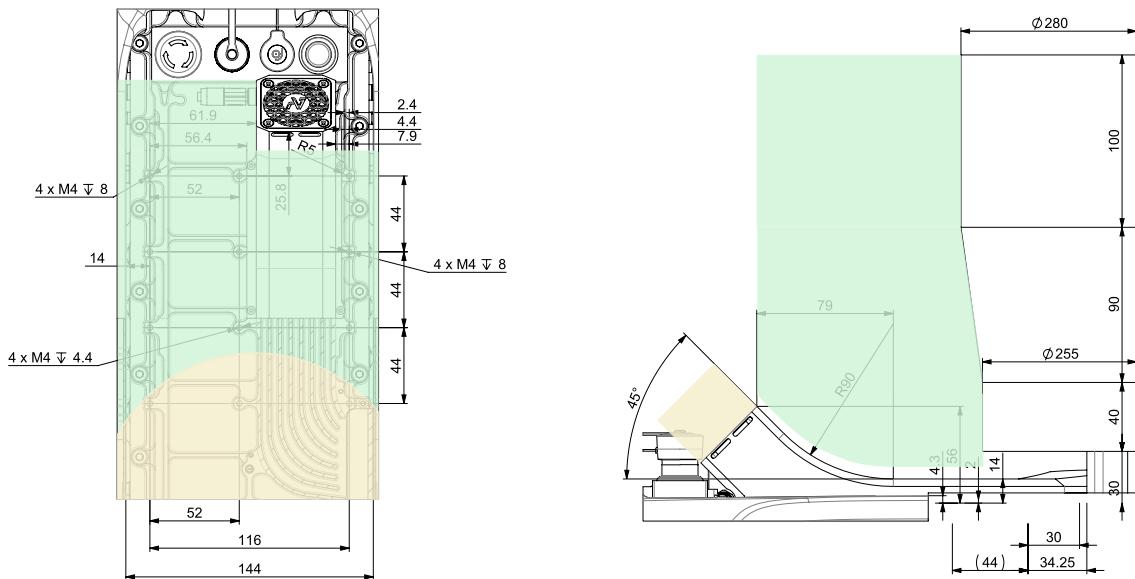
Mechanical interface with inspection payload fitted to the Robot
